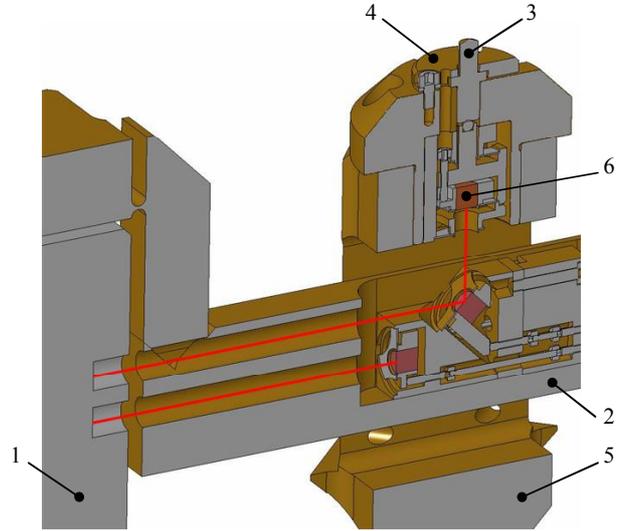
Indenter support with displacement sensor: fixed laser interferometer (1) with support bar and tilted mirror (2), indenter (3), indenter clamping ring (4), indenter support frame (5), axially guided reflective mirror (6)
